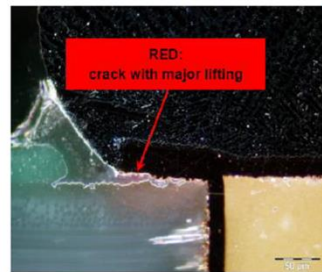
Cross-section image shows pad cratering under the PCB pad (via-in pad)
